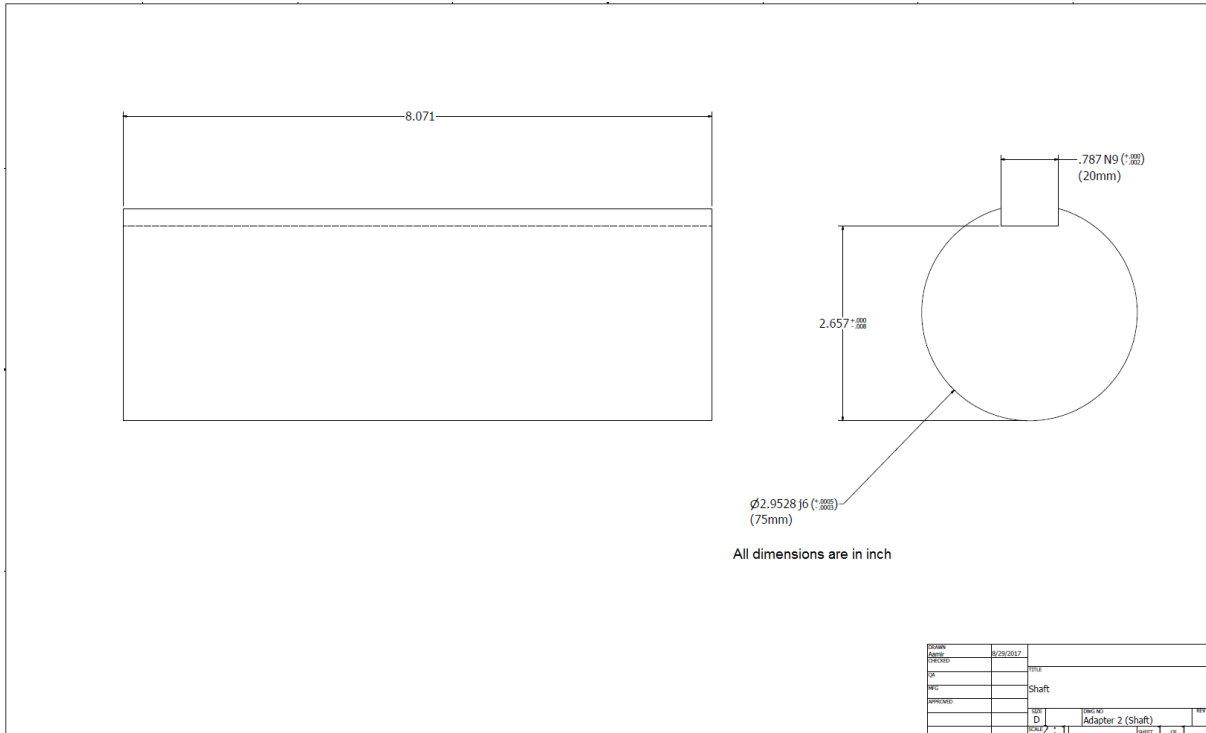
New shaft to couple clutch adapter and C.V. joint.
